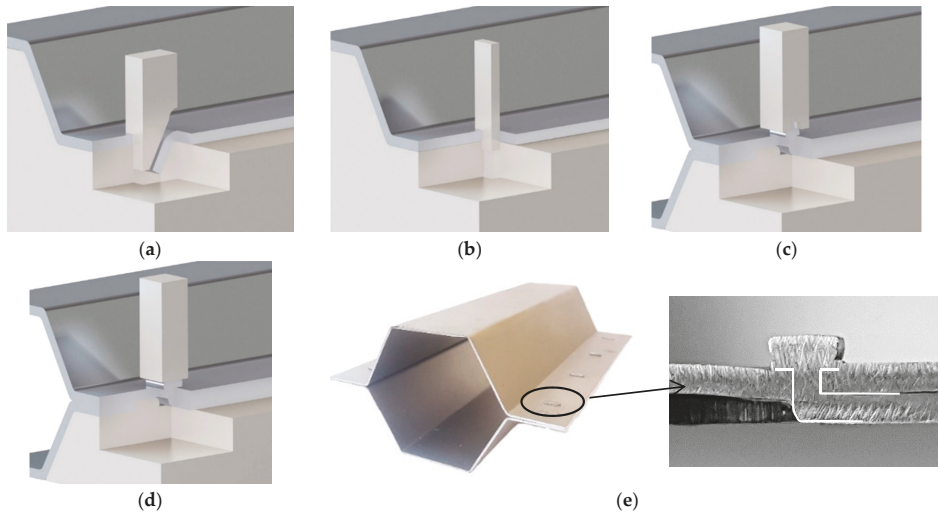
New fabrication process to assemble the individual formed panels of thin-walled crash boxes with double-hat shaped sections: (a) lancing (shearing and bending) of the tenon; (b) shearing of the mortise; (c) sheet-bulk compression of the tenon with a tapered punch; (d) mechanical locking by sheet-bulk compression of the tenon with a flat punch; (e) cross-section of a “mortise-and-tenon” joint. Note: the lancing in (a) is upside-down in order to replicate the press movement.
